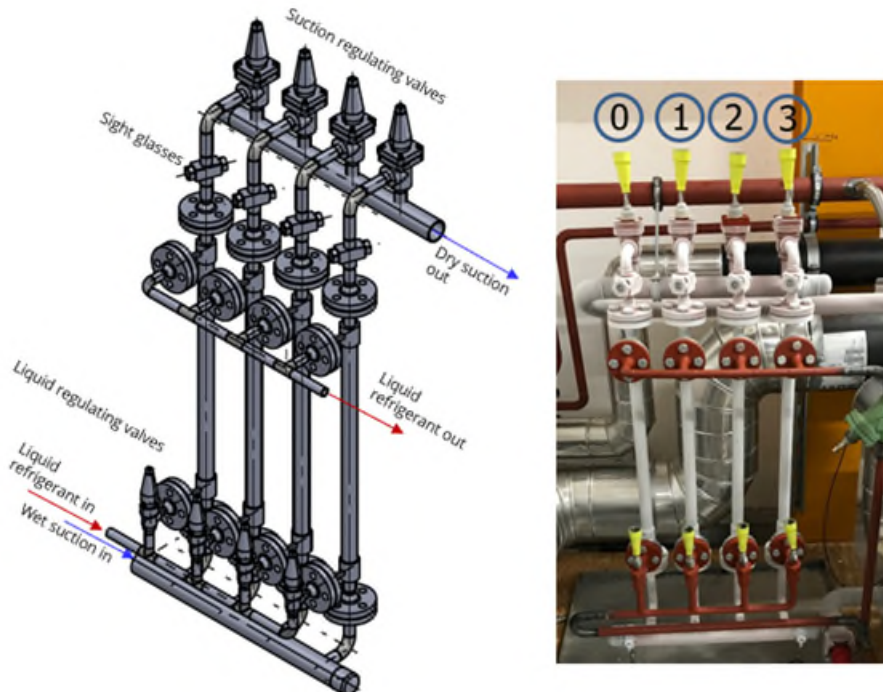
SGHX assembly drawing on the left side and picture of the installed SGHX on the right.
